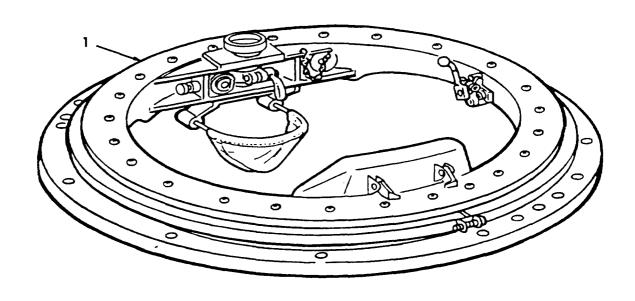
Ring, Mount, Machine Gun, M66 7012810 (Assembled View).
